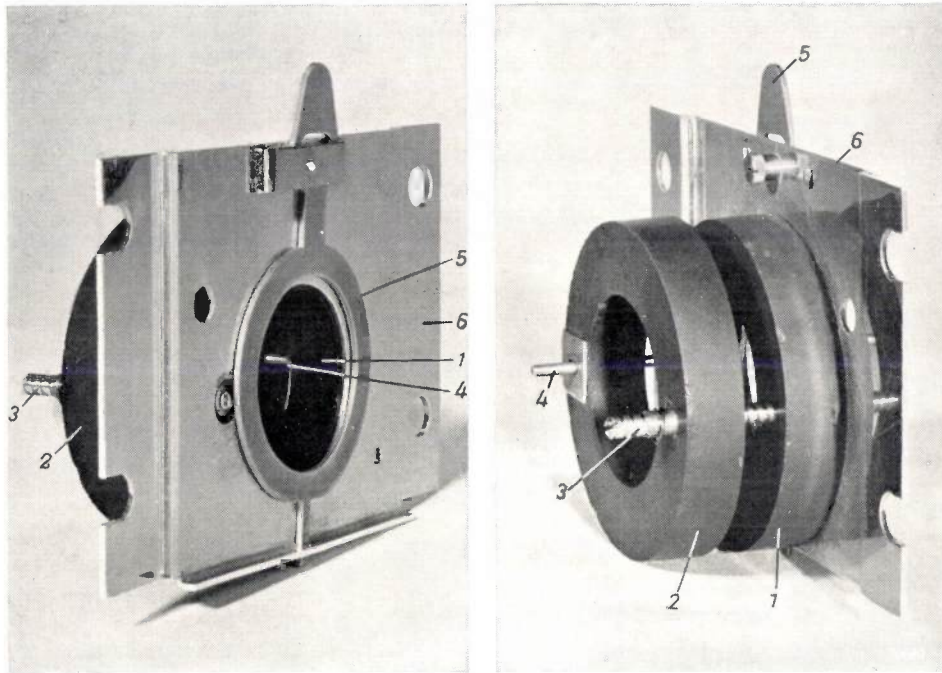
Two photographs of a focusing unit made up of two Ferroxidure rings (1 and 2) axially magnetized in opposite directions. The distance between the rings is adjusted by the screw 3. 4 is a guide pin, 5 an adjustable soft iron ring with which the electron beam can be centered. The plate 6 is of aluminium. The focusing unit seen in *fig. 1* is of slightly different construction.
